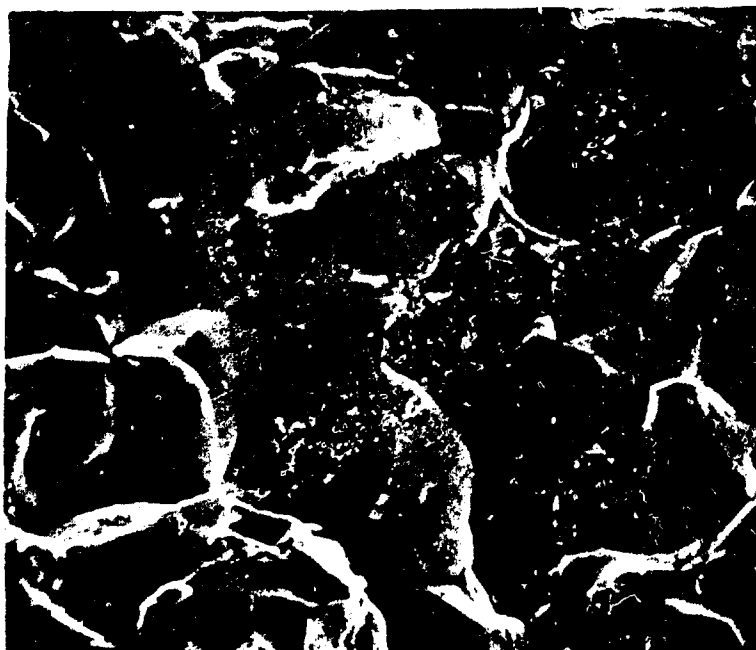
SEM fractograph of cracked split ring showing intergranular mode of fracture.
